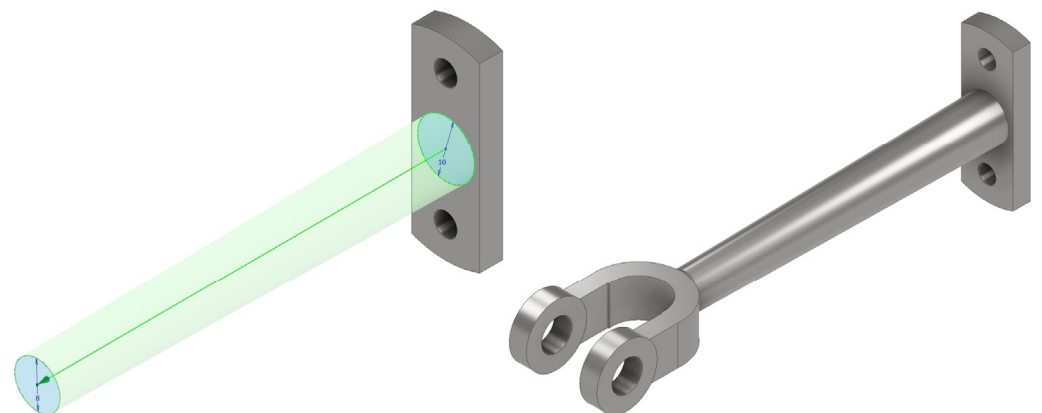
Design of the crosshead: sketch and extrude operation (left) and removal operation (right).
